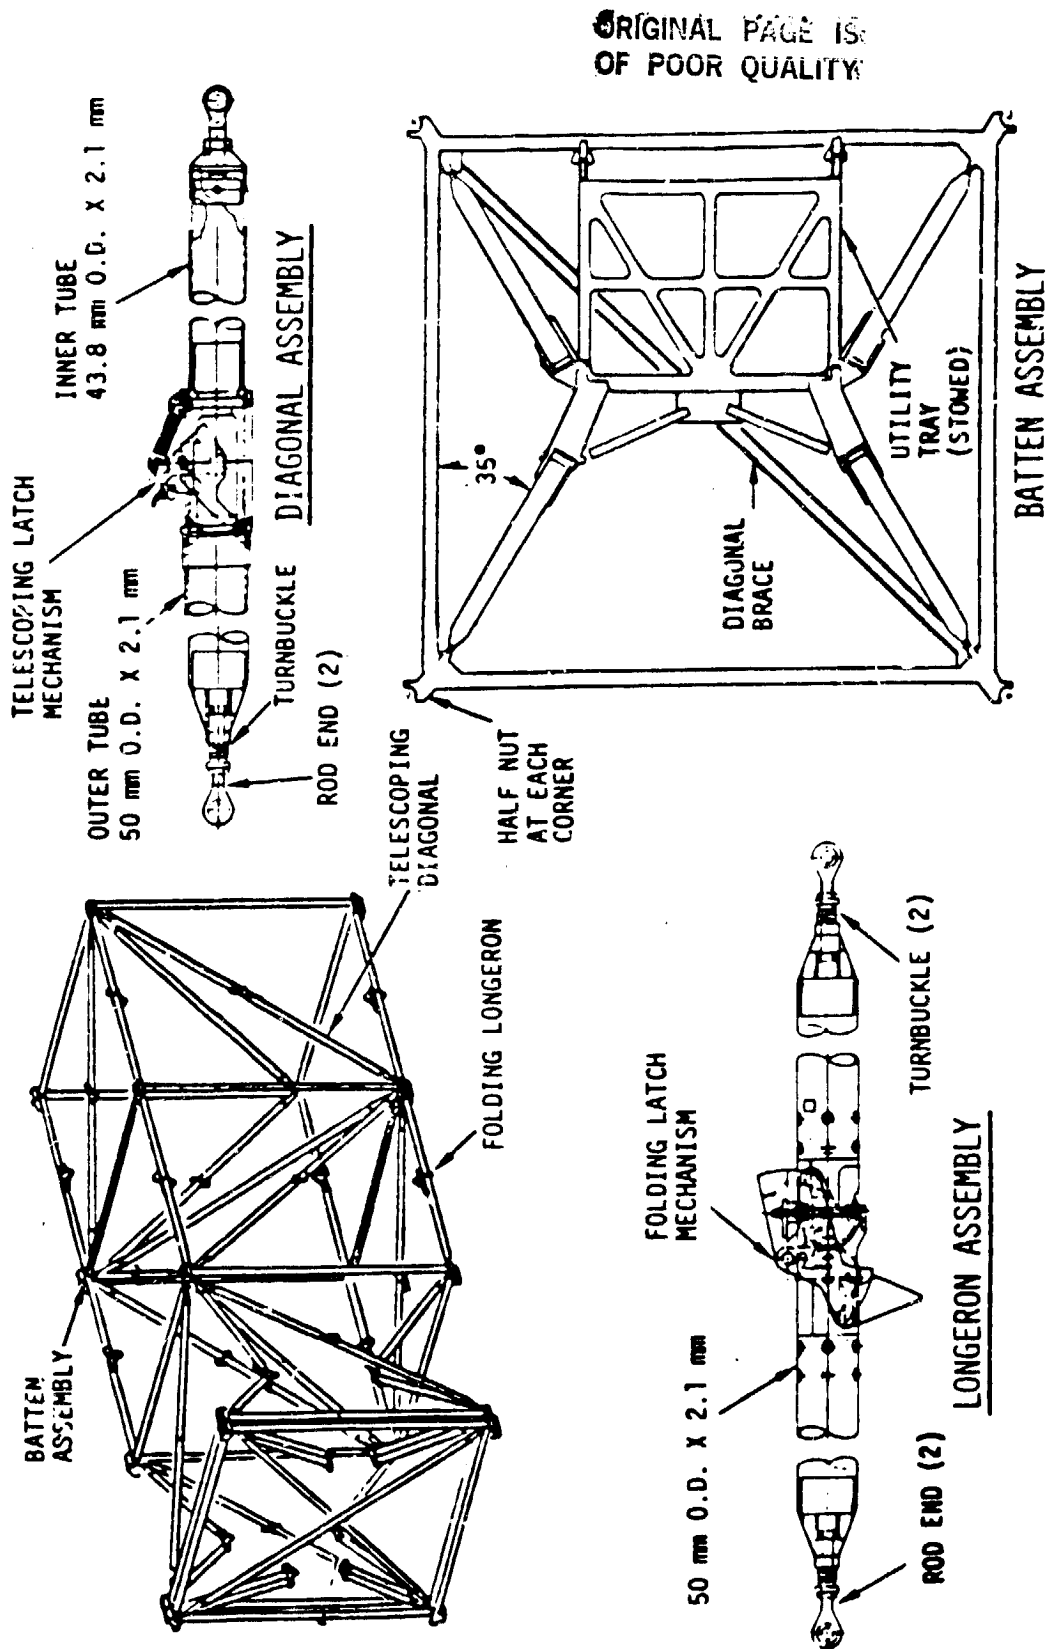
Typical Single Fold Deployable Truss Batten Frame.
